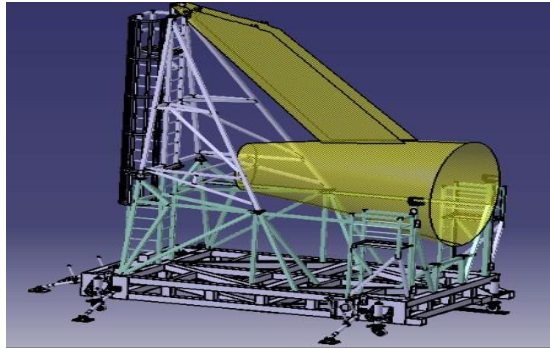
A jig for the assembly of cone and after fuselage (complicated)
